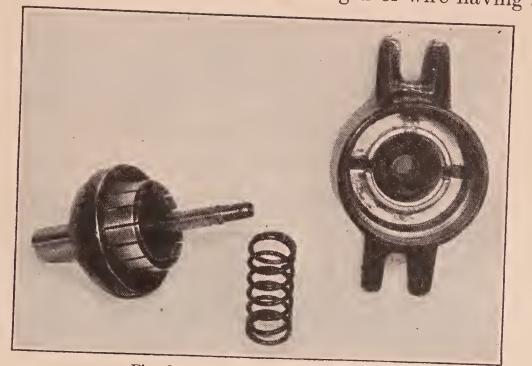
Details of Wagner Switch Courtesy of Wagner Electric Manufacturing Company, St. Louis, Missouri
